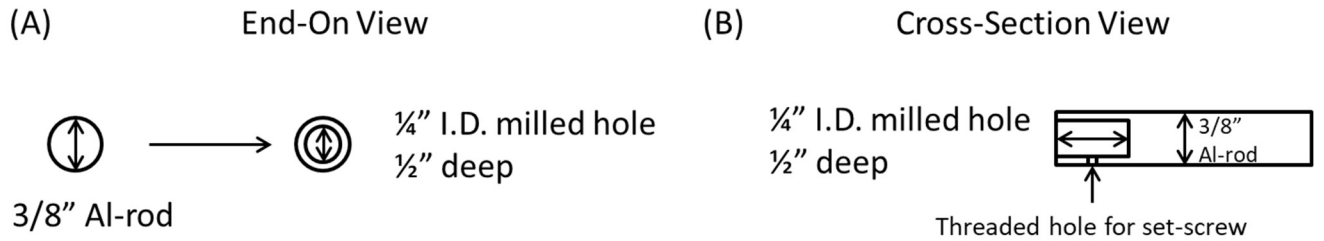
Aluminum rod milling schematics showing (A) end-on view for motor drive shaft and (B) cross section for situating the setscrew to hold the rod to the drive shaft of the motor.
